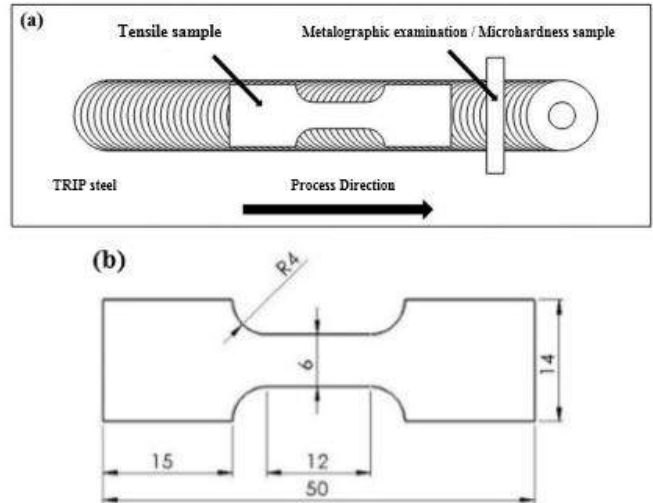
(a) Schematic illustrations of the FSPed plate and the position of the specimens inside the FSPed zone (b) Dimensions of tensile sample
